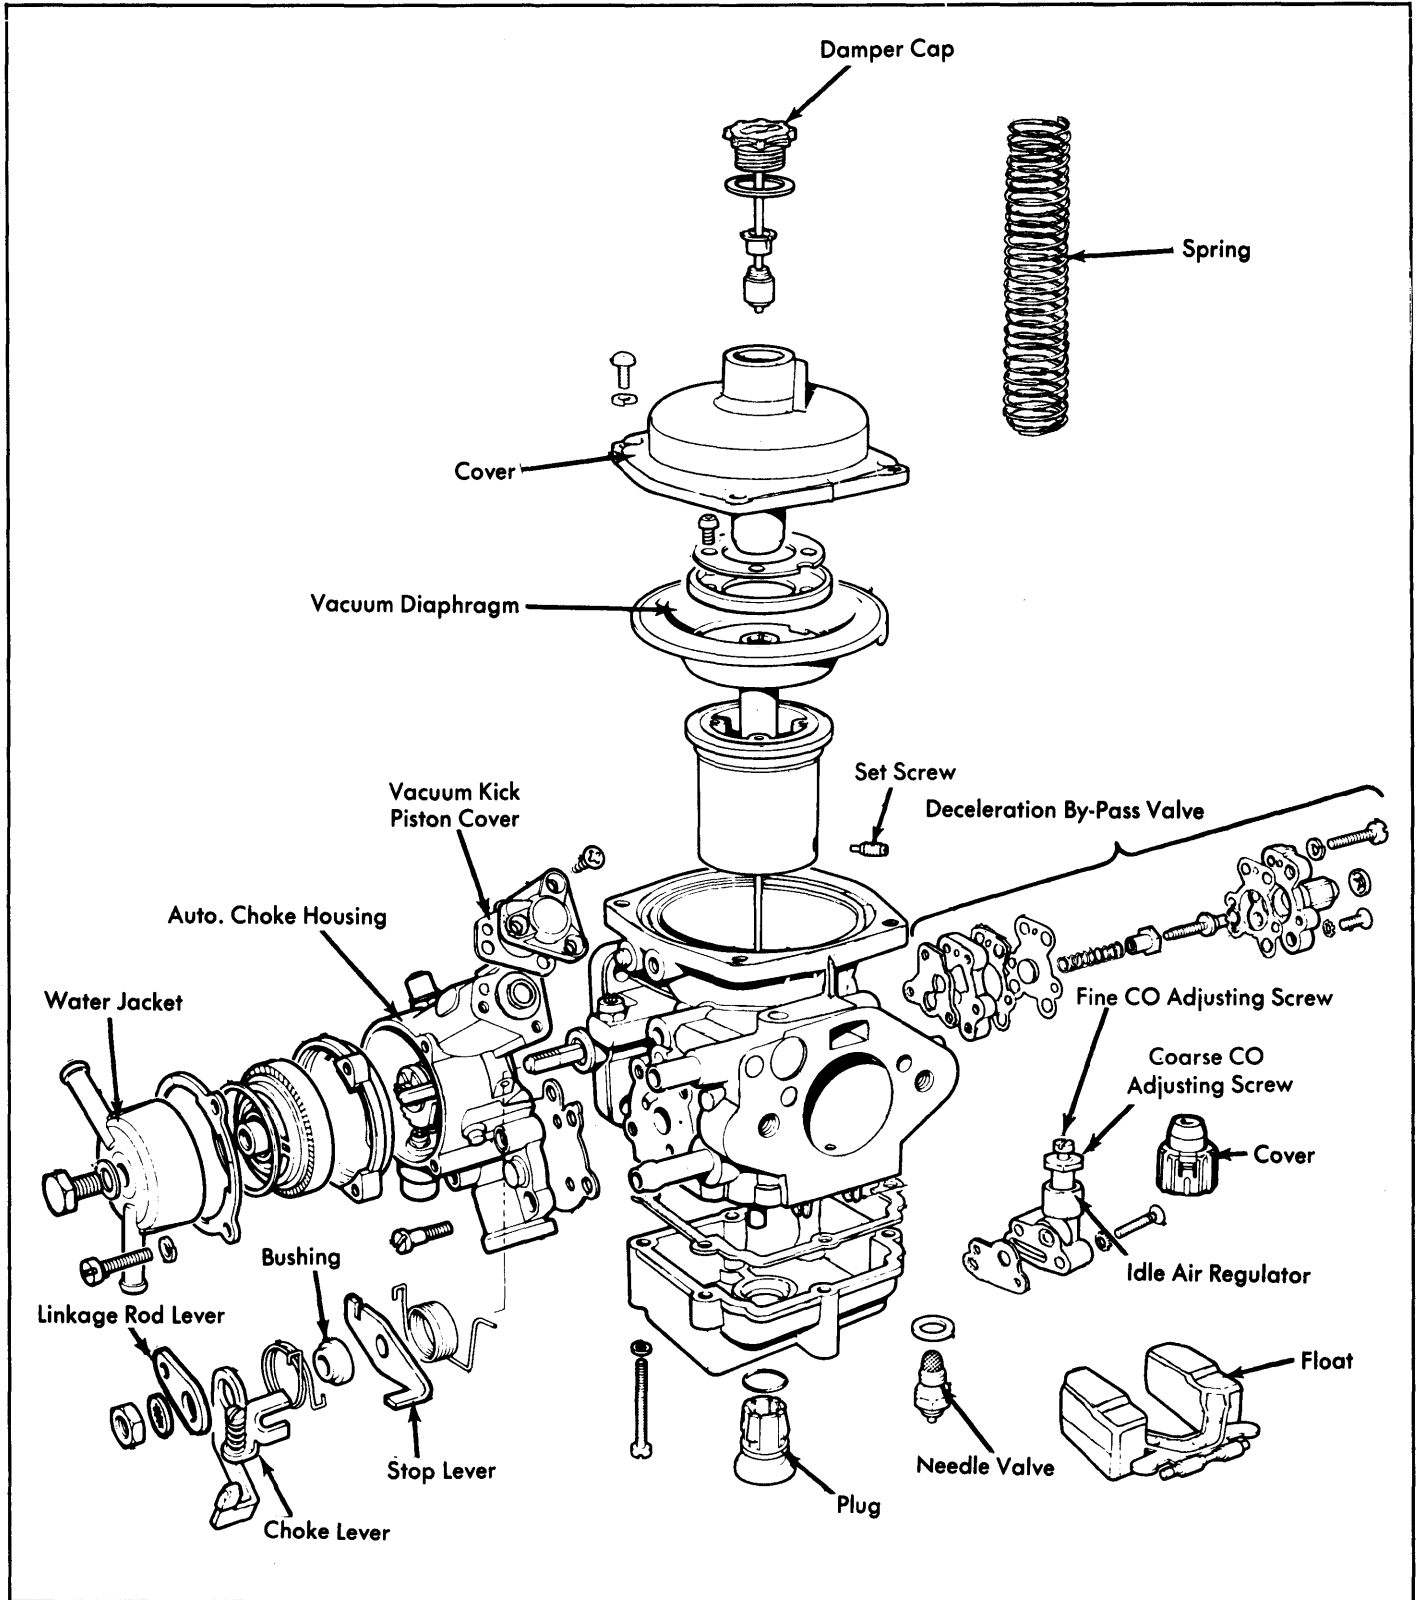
Exploded View of Zenith-Stromberg CD4 Carburetor
